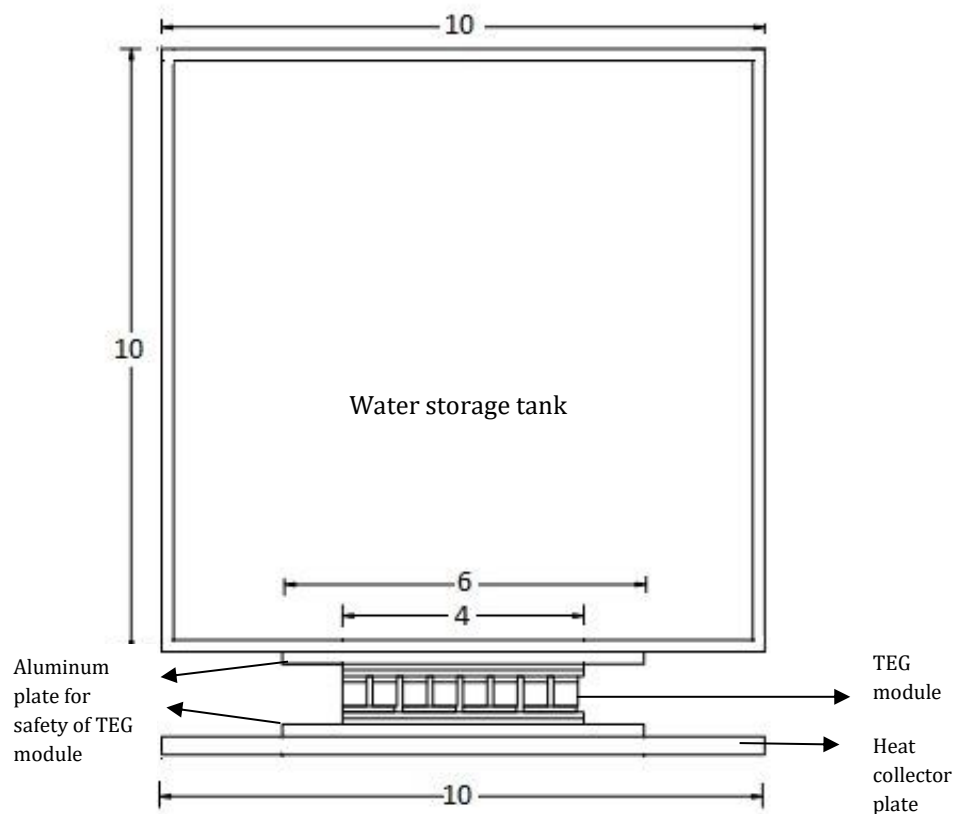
Top view of the TEG assembly (all dimension are in cm)
